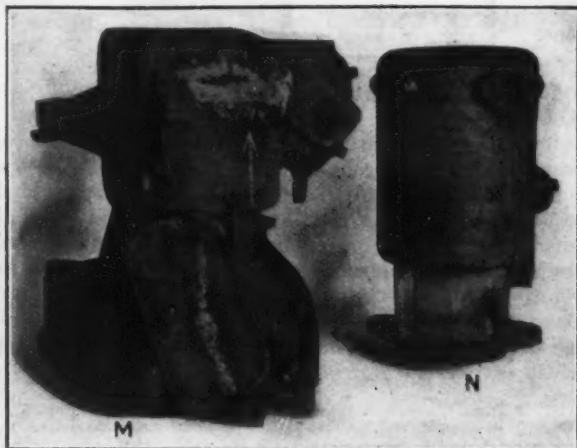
A Jacket Wall Closed with a Piece of Sheet Steel and a Broken Flange Repaired.
